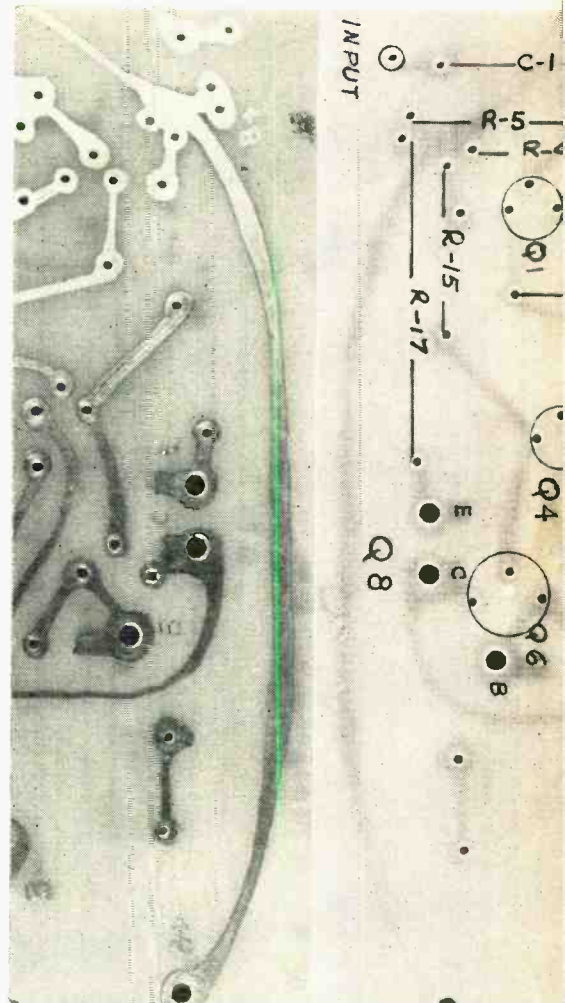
When the etching process is complete, wash the board to remove all traces of etching solution. Then, before dismantling the mock-up board, mark location of each component with India ink.
